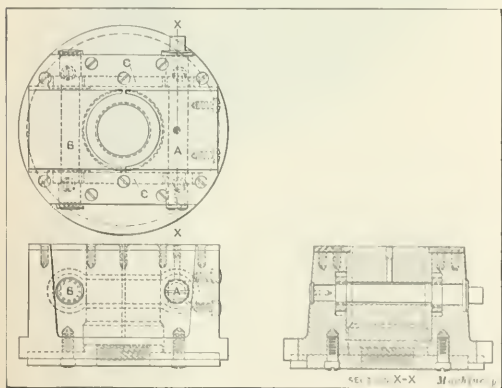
Plan, Side and Cross-sectional Views of Self-centering Chuck
